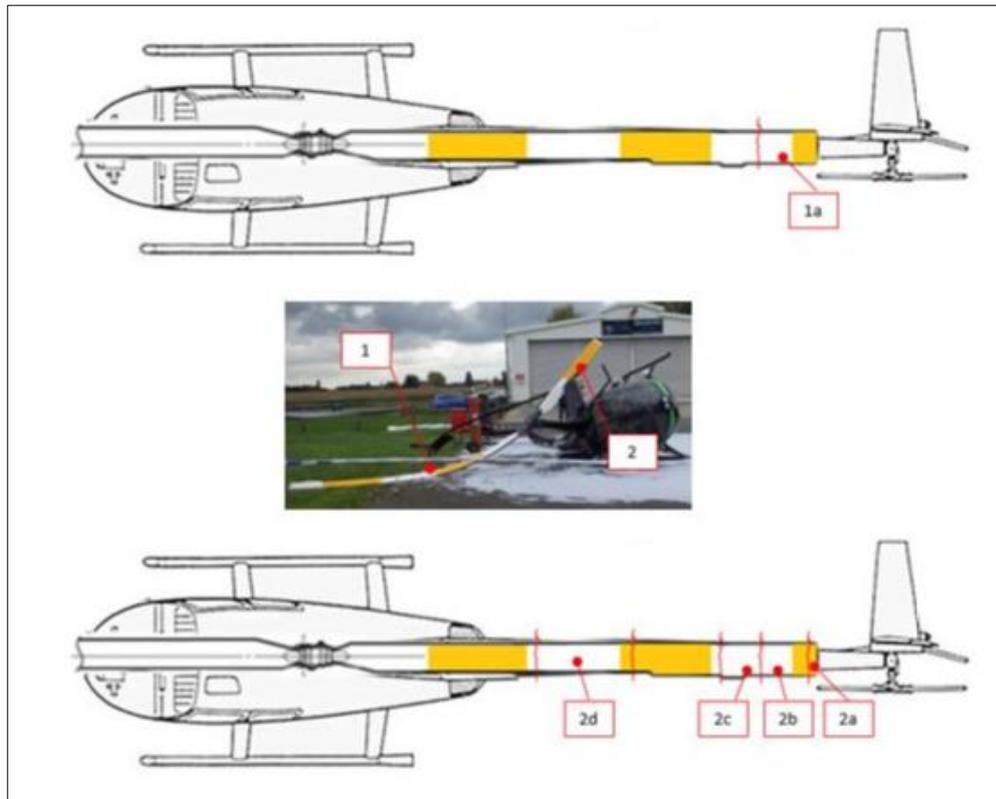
Sketch identifying the different severed parts of the main rotor blades
